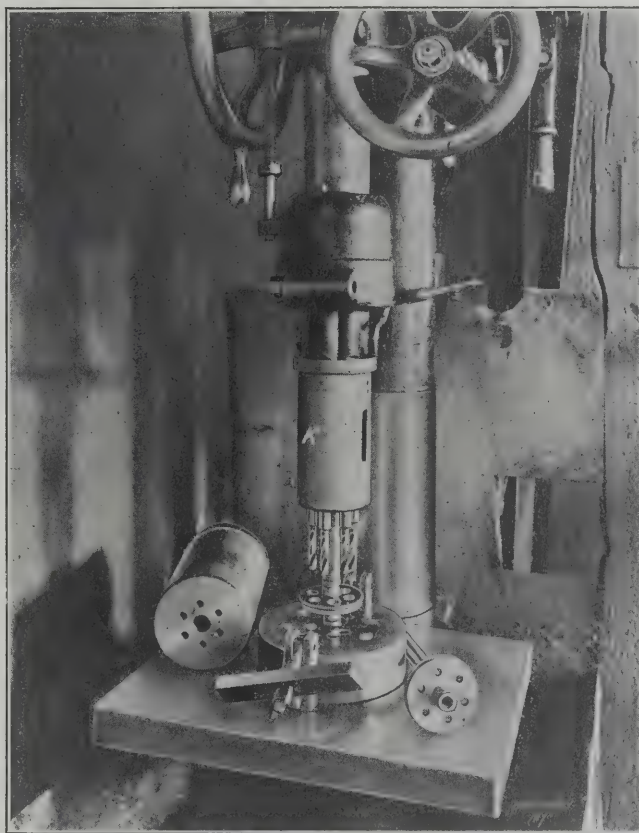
Multiple Spindle Attachment for Drilling the Rivet Holes in the Spindle Flange and Bowl
